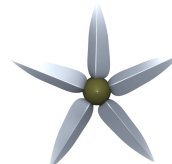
Front View of CAD Drawing of High Lift Propeller.
